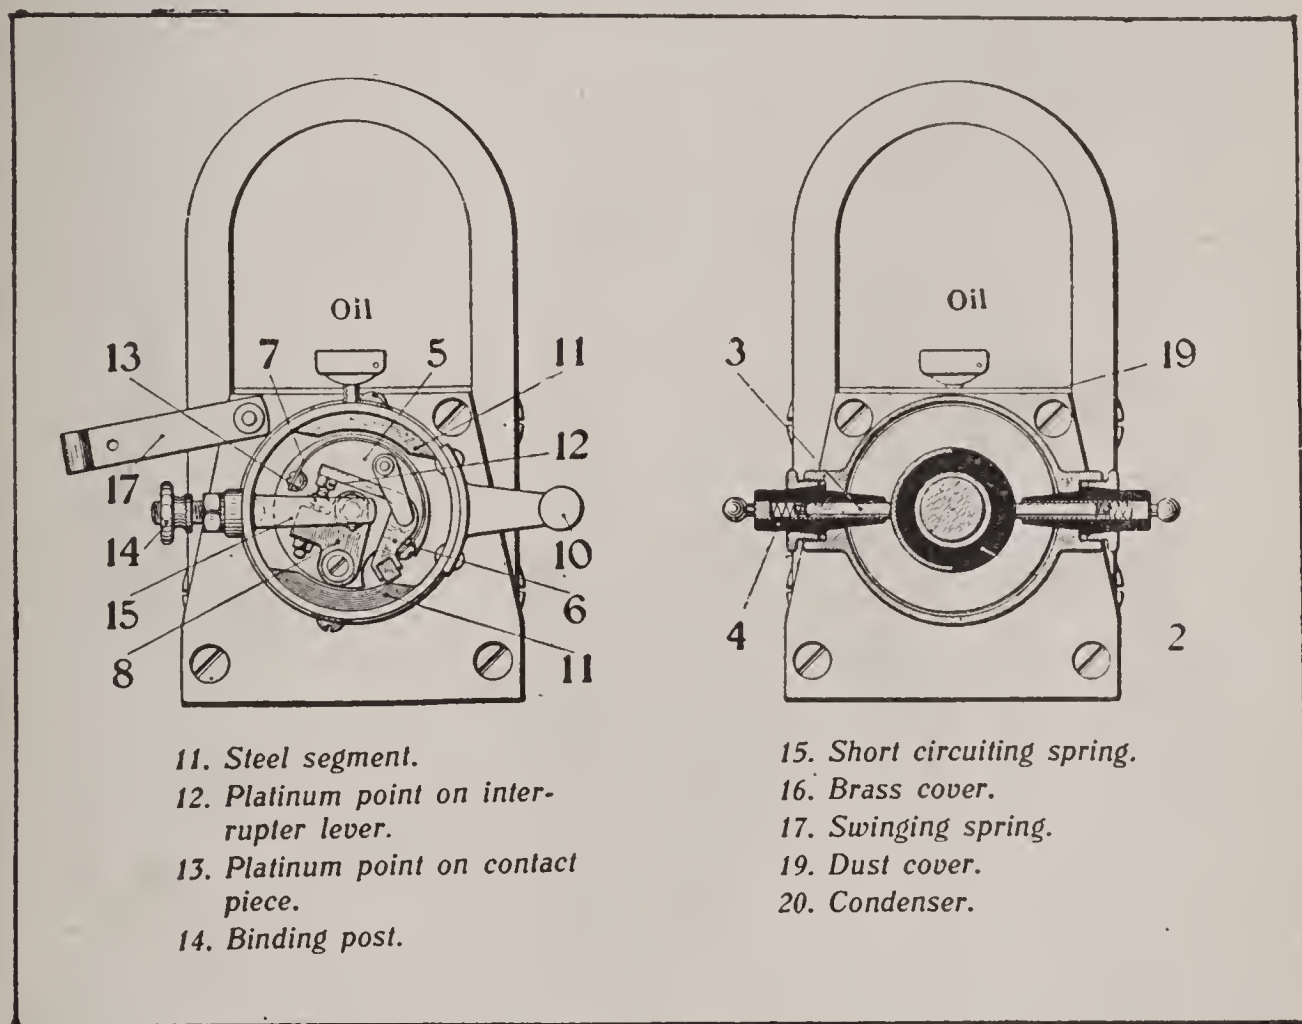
Views Showing Contact Breaker and Distributor Arrangement of Bosch Magneto for Two Cylinder Engines.
